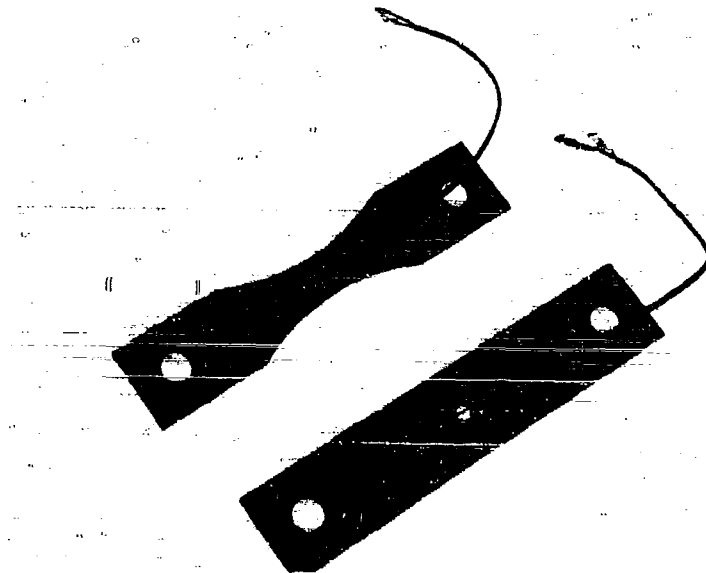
Thermocouple Installation on Fusion-Welded and Notched Fatigue Test Specimens
